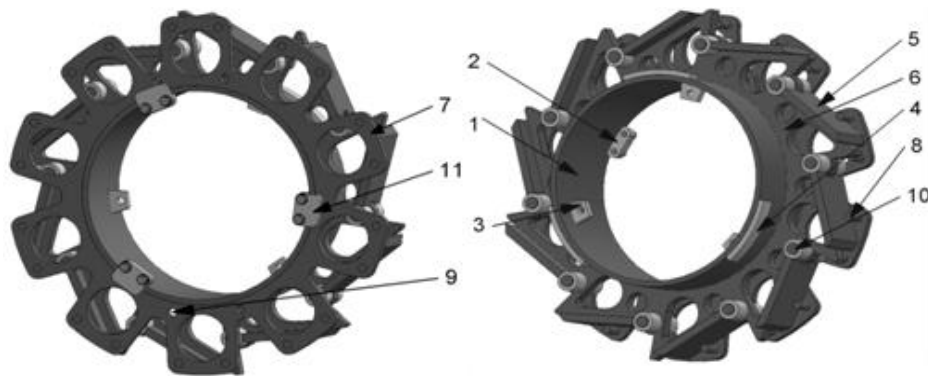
Auto-ejected blades wheels: 1 – bearing tube; 2 – locking handle; 3 – bracket fastening the device to the disc of wheel; 4 – spacer plates; 5 – blades; 6 – carrier wheel; 7 – controlling disc of blades; 8 – guide pin, 9 – locking hole; 10 – pin of vanes; 11 – buffer plate.
